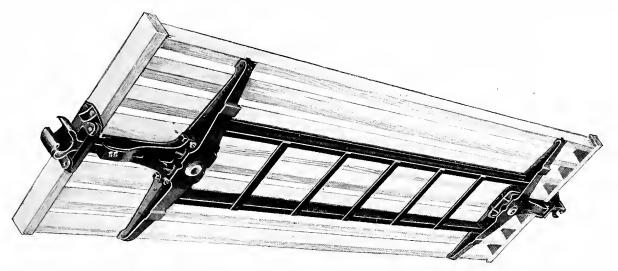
Application of Cast Steel Transom Draft Gear with Reinforcements for Old Cars. Commonwealth Steel Company.
